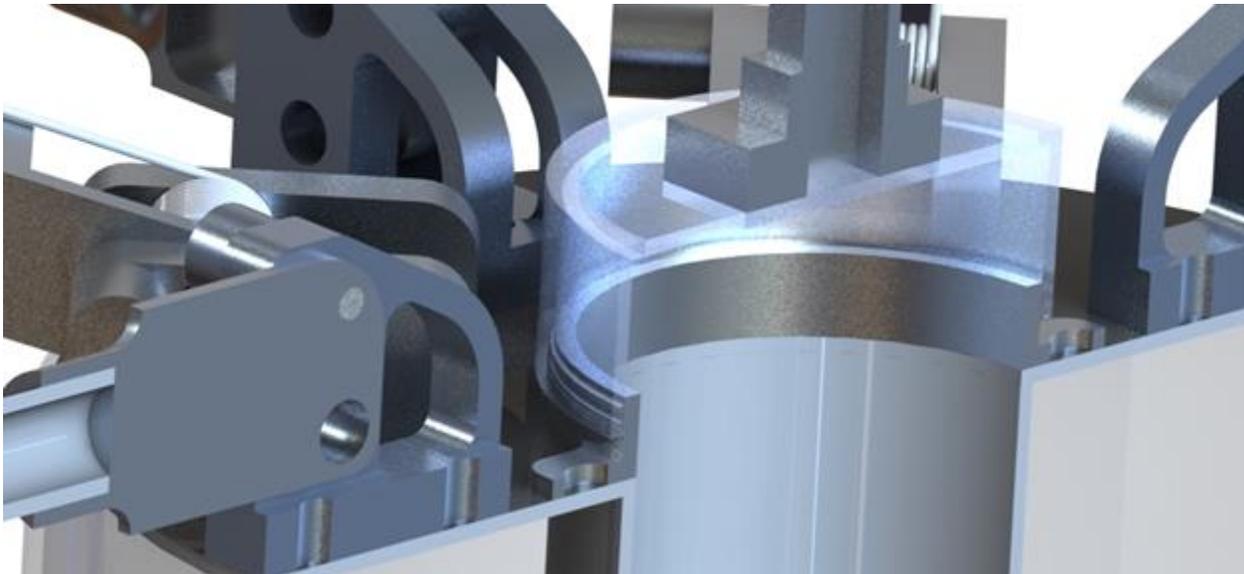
Section view of the thread coupler mated from above onto the torque flange
